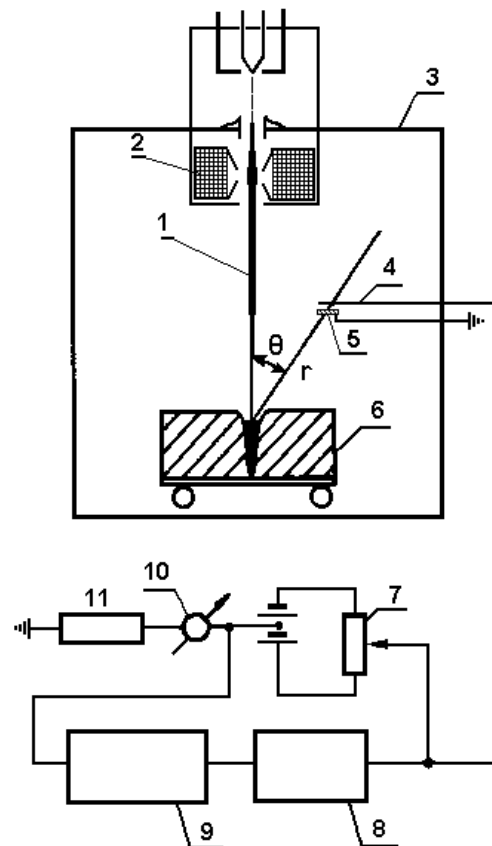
MEASUREMENTS OF PLASMA PARAMETERS DURING ELECTRON BEAM WELDING [4]
